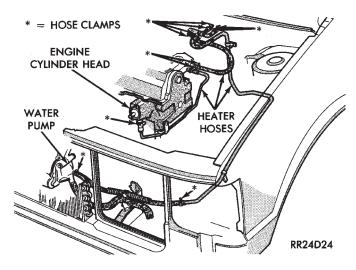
Heater Hose Routing — 2.5L Engine WATER CONTROL VALVE
